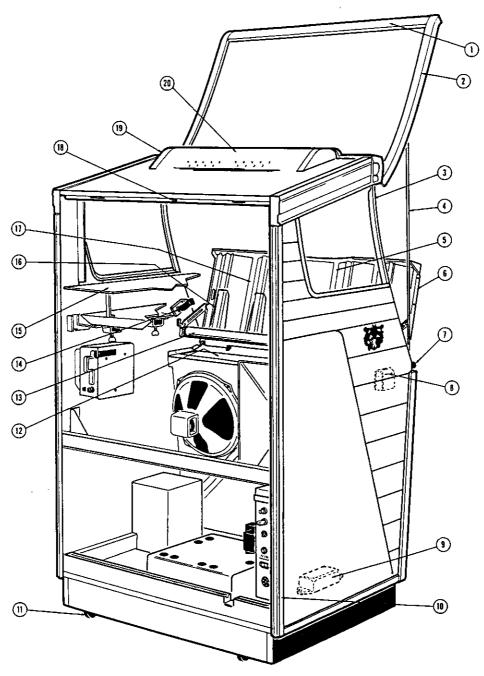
TRIM AND MOUNTING - REAR VIEW
